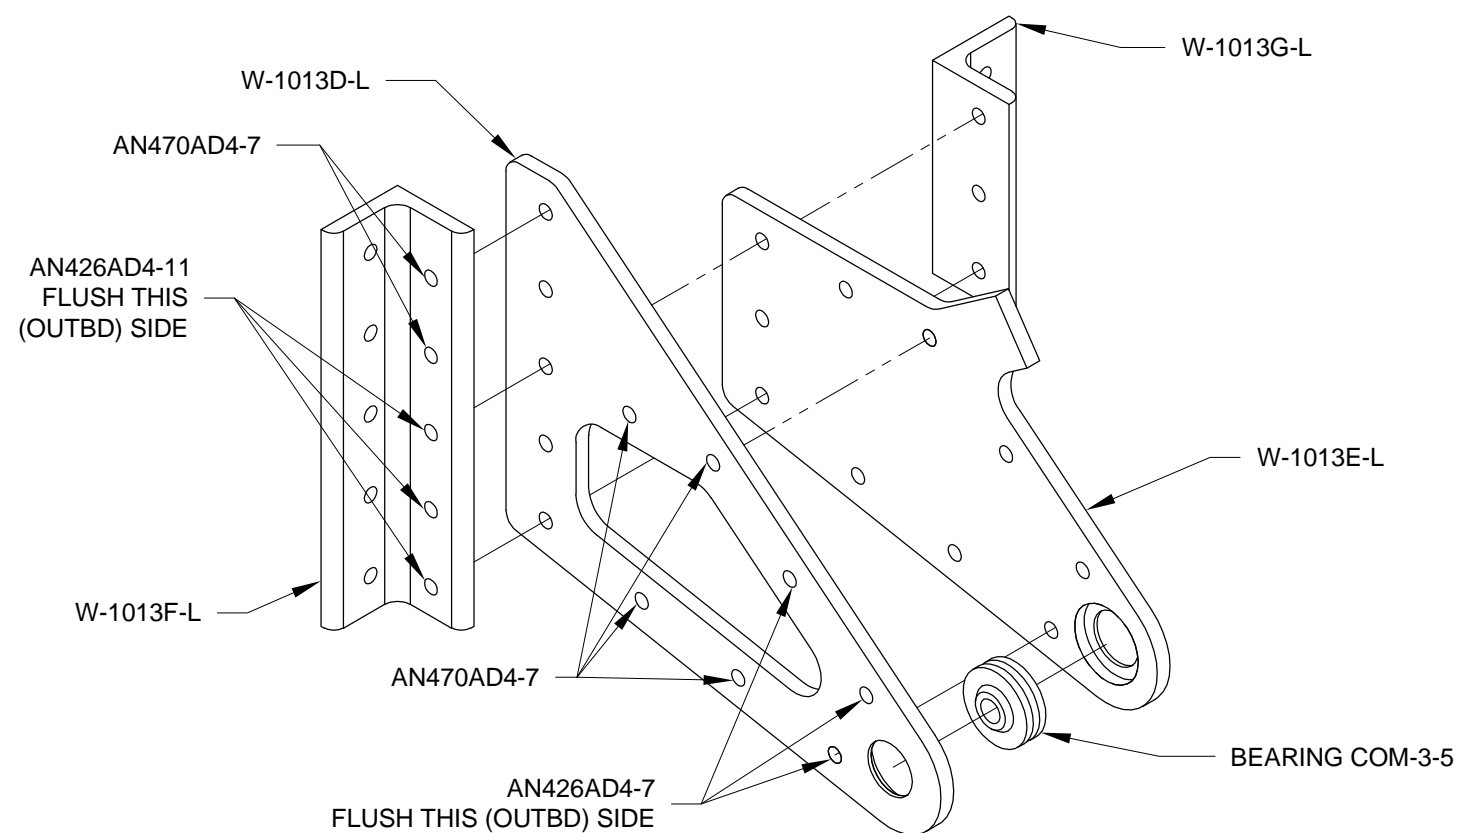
W-1013-L INBOARD AILERON BRACKET ASSEMBLY
